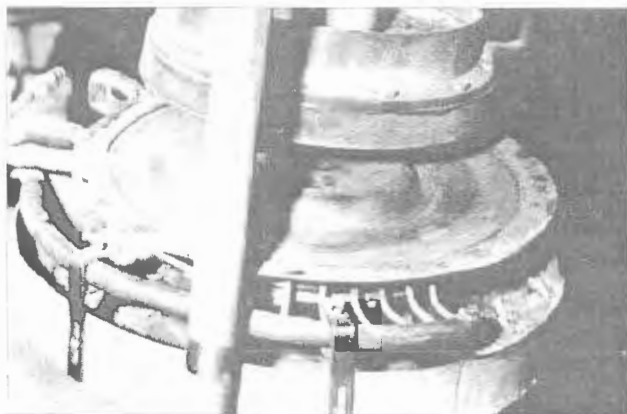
Device for hardfacing a solid-drawn cutter using a segment inductor
